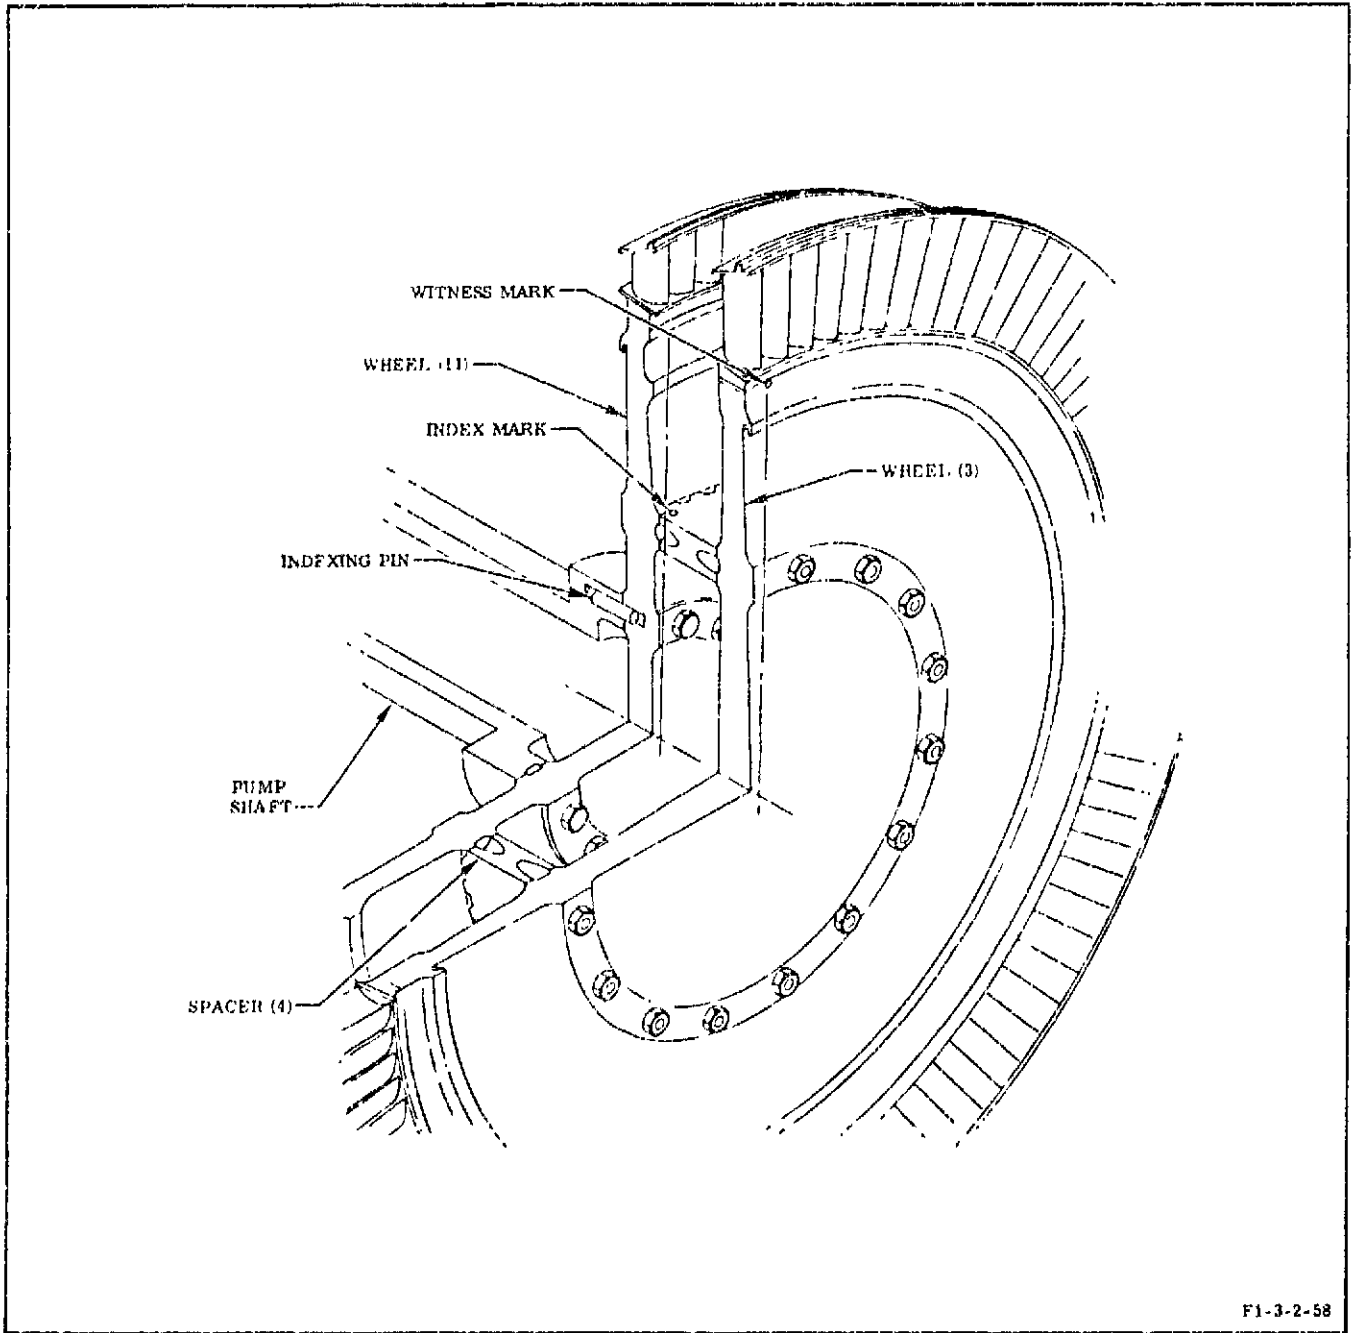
A-6. Alining Turbine Wheels and Spacer to Pump Shaft
